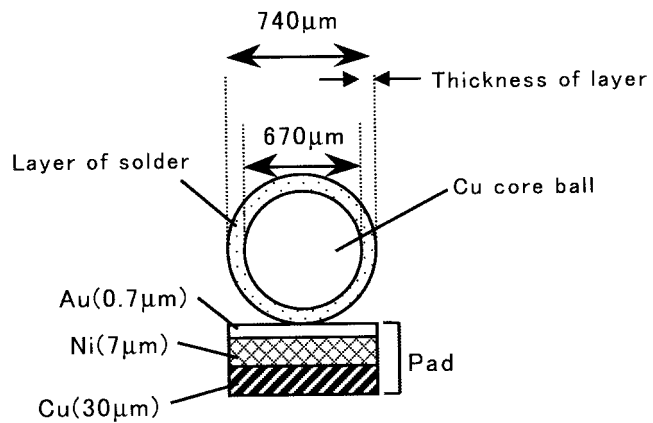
Schematic illustration of solder ball and pad for BGA joints used in this study.
